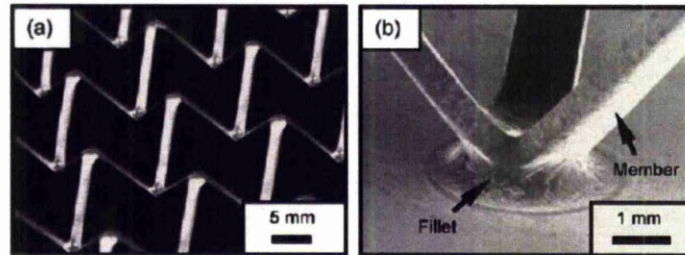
Pressed tetrahedral truss core and bond to face plate [9].
